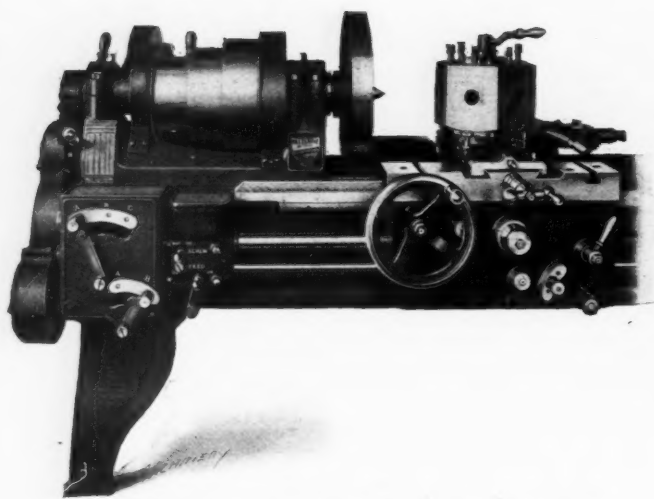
"Roulsted" Engine Lathe equipped with Turret Toolpost
